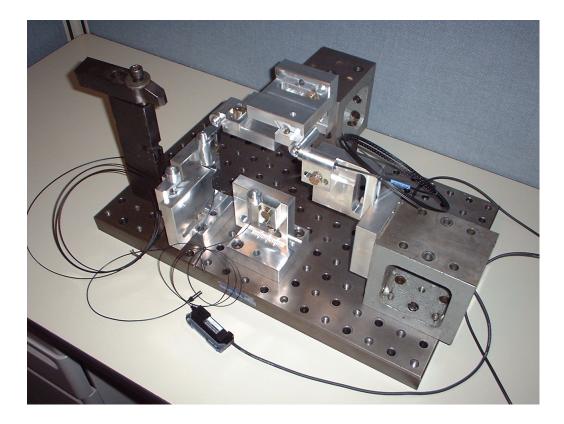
The graphical illustration of test fixture assembly with workpiece loaded
